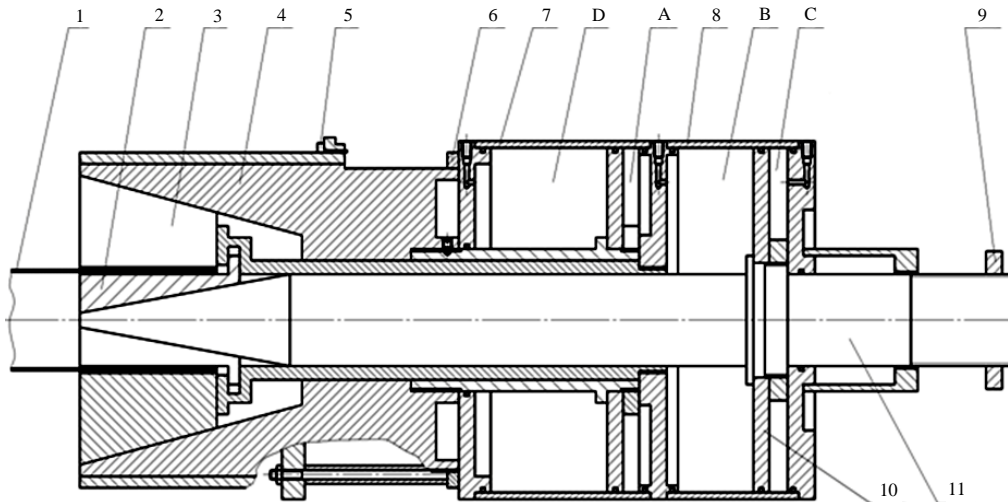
The hydraulic calibrating head: 1: tubular detail; 2: punch; 3: basic matrix; 4: squeezing faucet; 5: pilot switch; 6: blocker ring; 7, 8: actuating cylinders; 9: blocker ring; 10: punch drive cylinder piston; 11: piston of cylinder of the drive of punch; A: a head end of the drive of matrix; B: a rod end of the drive of punch; C: a head end of the drive of punch; D: a rod end of the drive of matrix
